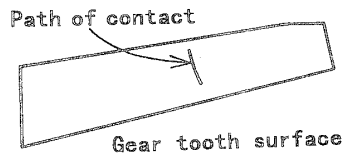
Path of contact on gear tooth surface of convex side(as summary)
